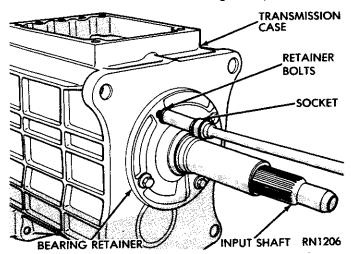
Removing/Installing Front Bearing Retainer Bolts
